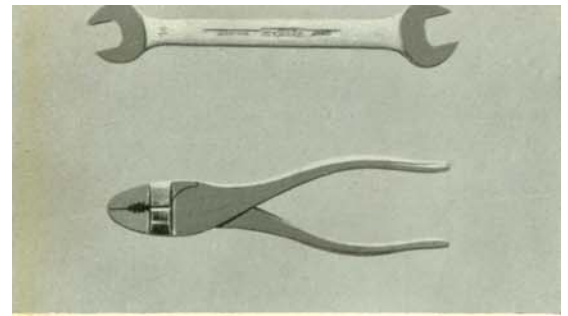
Tools: Open ended spanner 14 mm, pliers.
